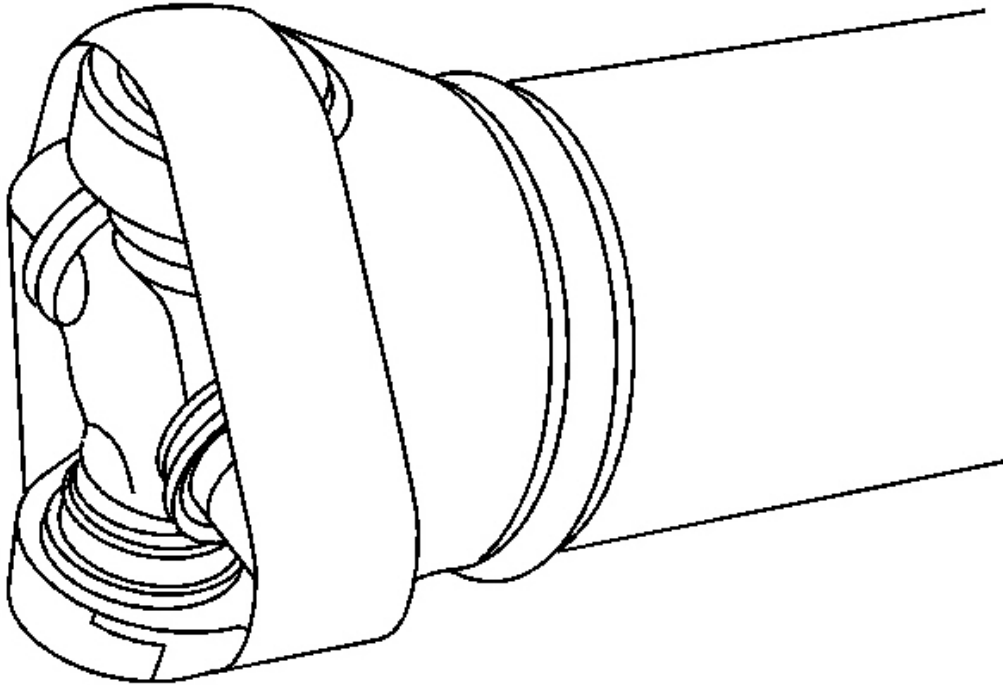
View Of Wrapped U-Joint Bearing Caps
